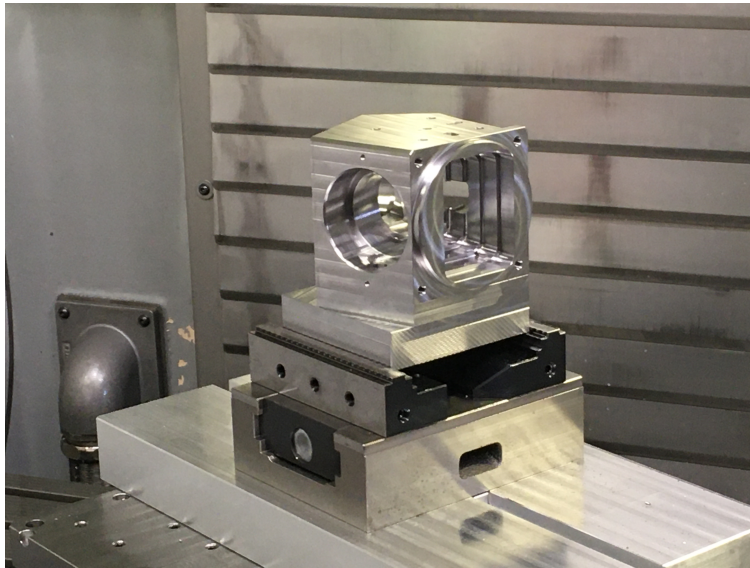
Manufacturing of the mechanical structure of the Alpha-Z prototype using 5 axis machining
